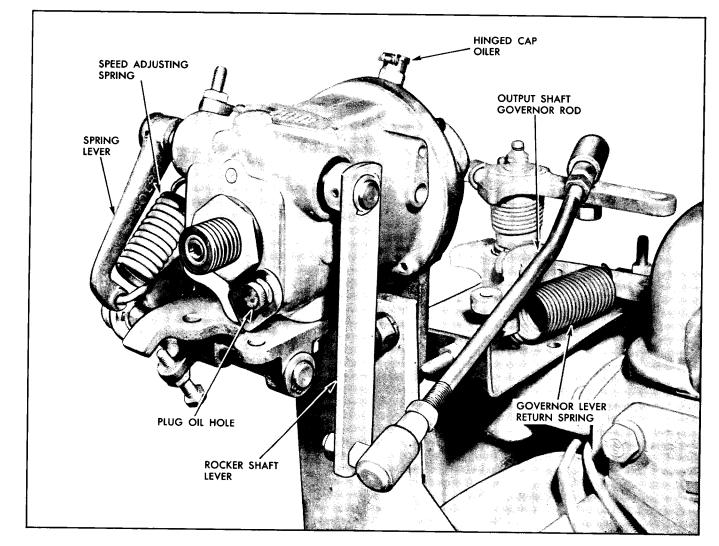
Mounting of Output Shaft Governor and Linkage to Engine Governor – Viewed from Front of Engine
